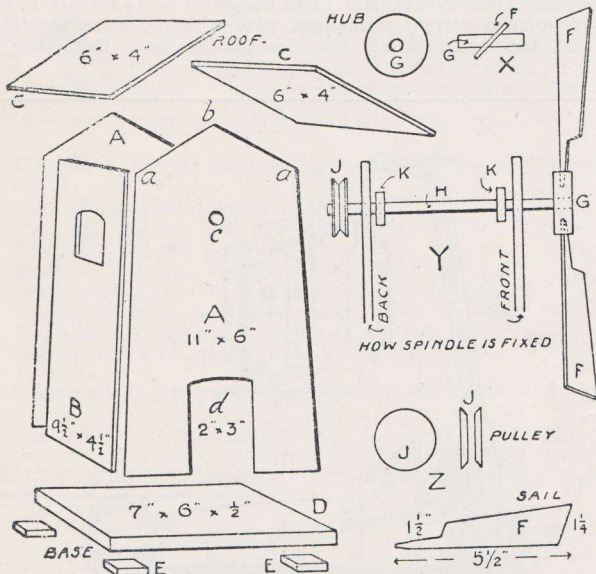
CONSTRUCTIVE PARTS OF MODEL WINDMILL.
